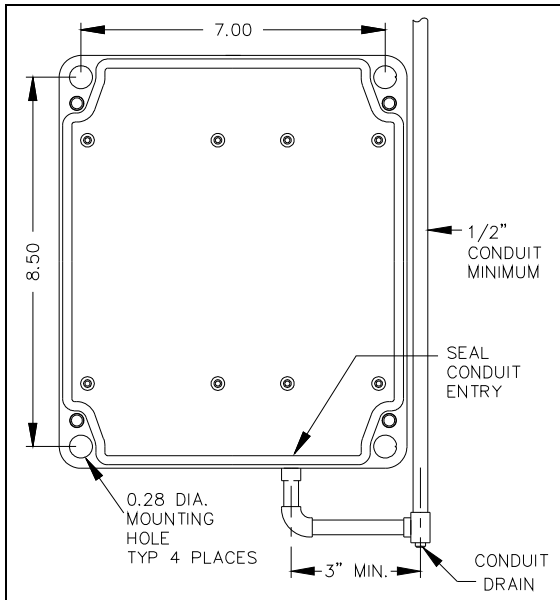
Bottom entry conduit recommended for non-metallic enclosures
